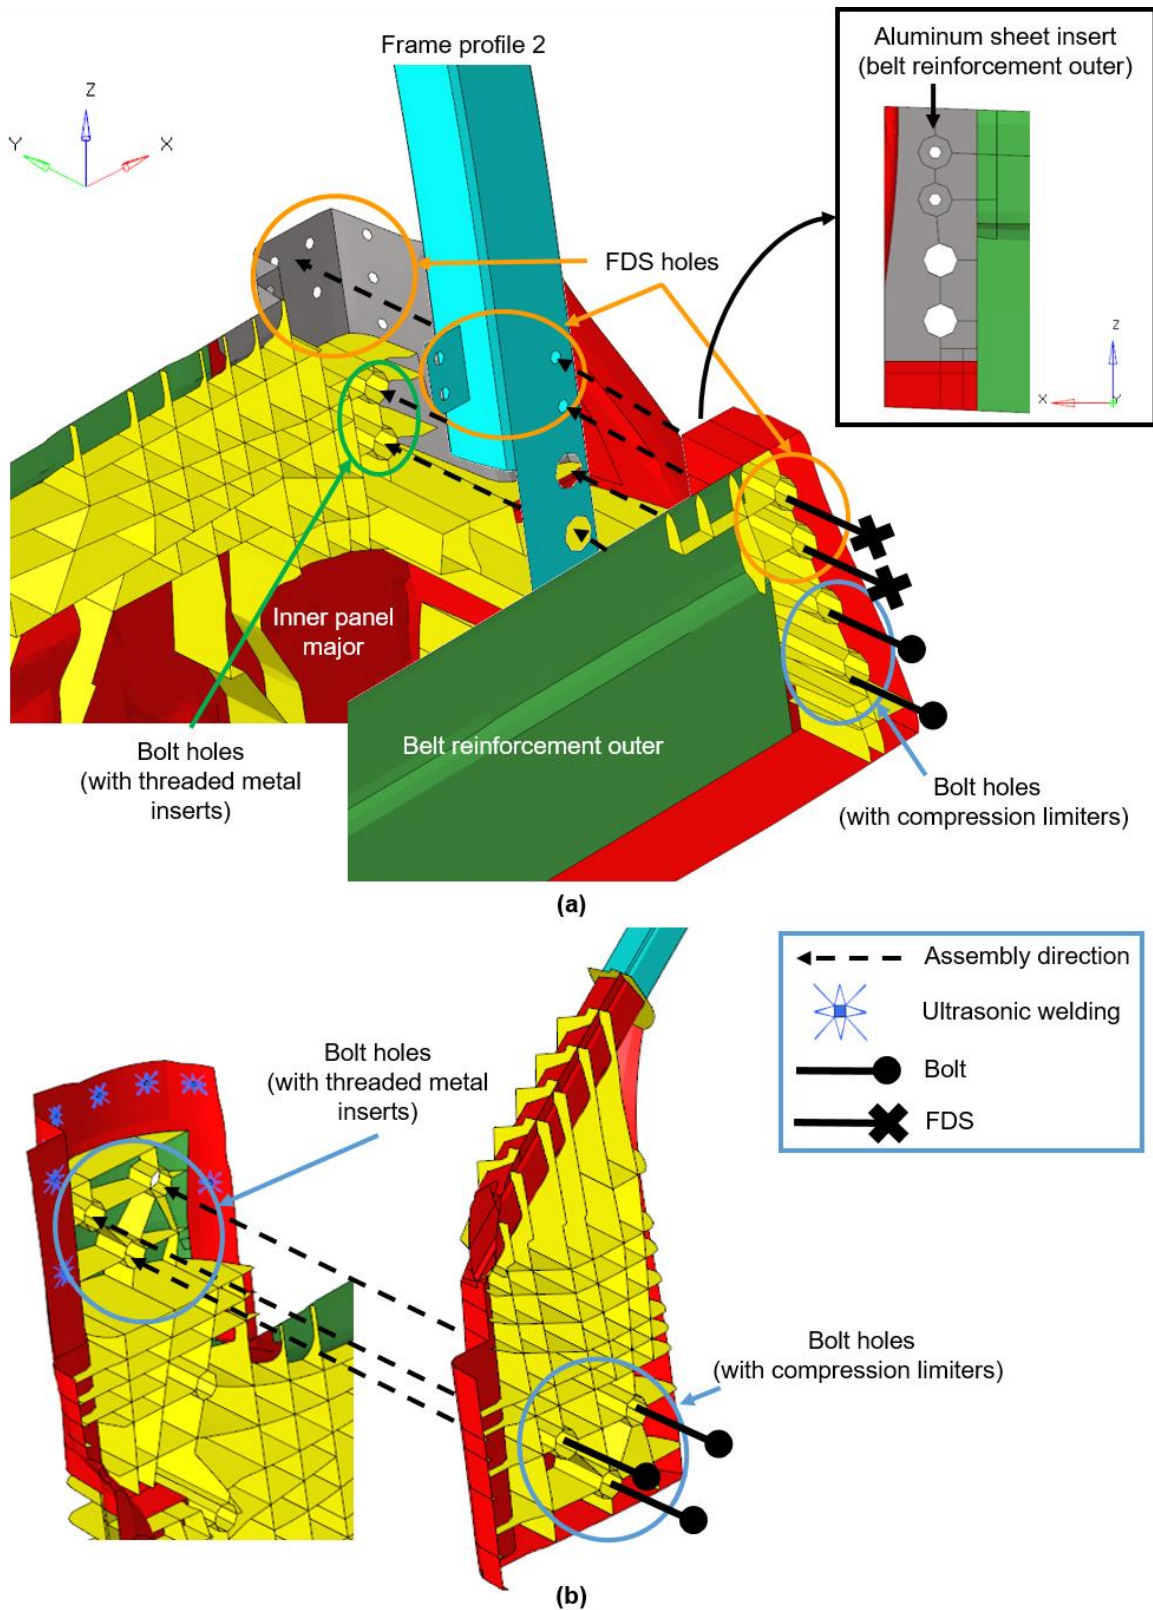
Concept 1 – joining concept in area J1 (a) and J2 (b) (in Figure 6-1)
